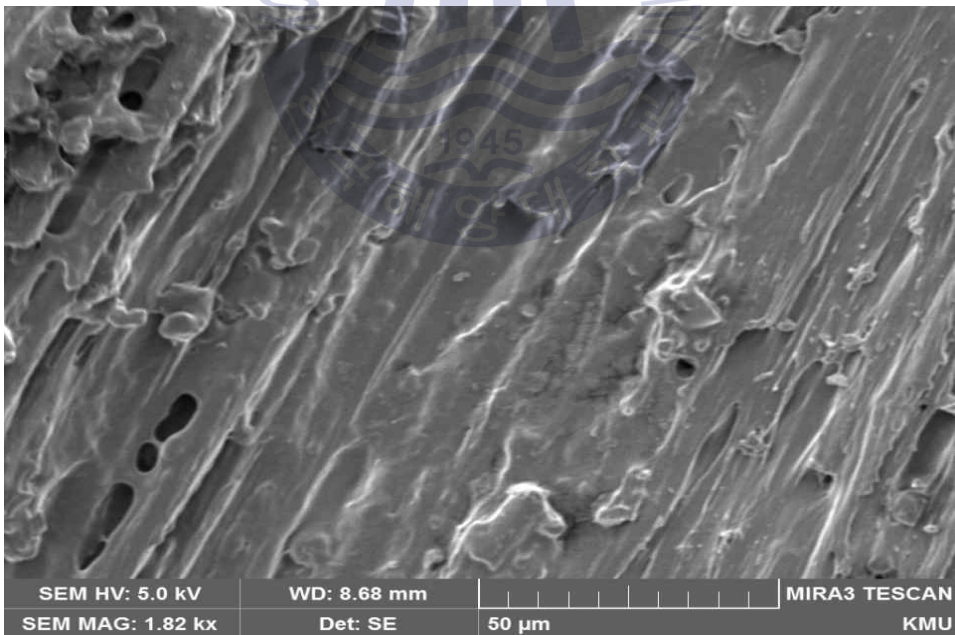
Fracture surface of Vacuum forming specimen (longitudinal tensile)
